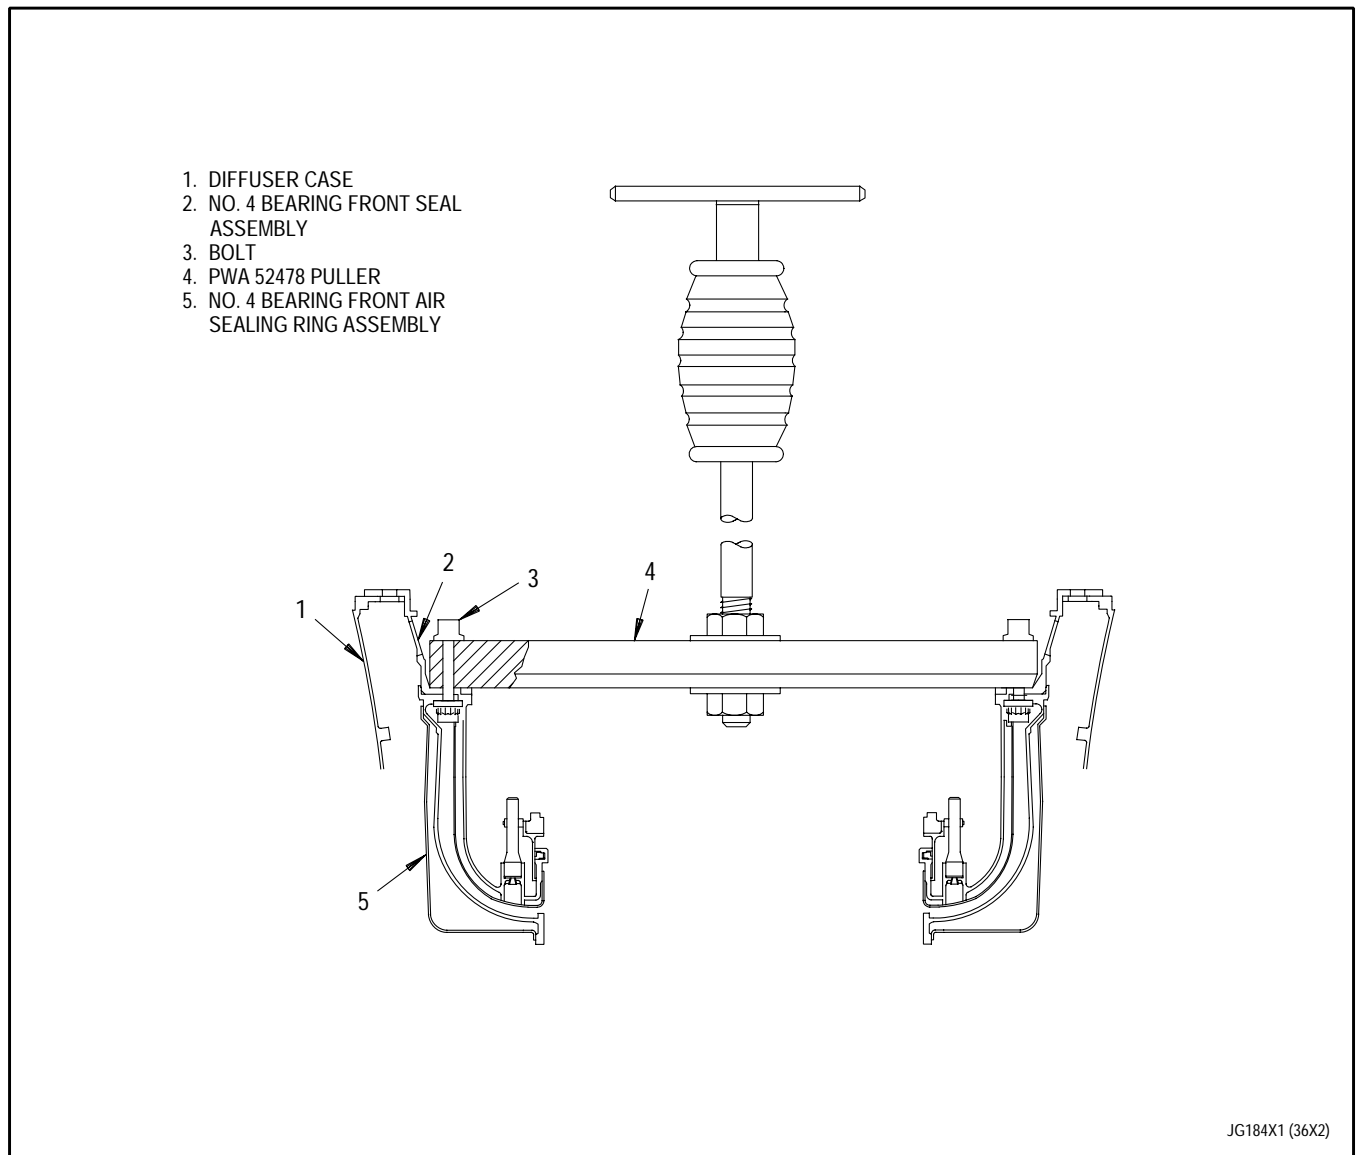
No. 4 Bearing Front Seal Assembly and No. 4 Bearing Front Air Sealing Ring - Removal With PWA 52478 Puller
